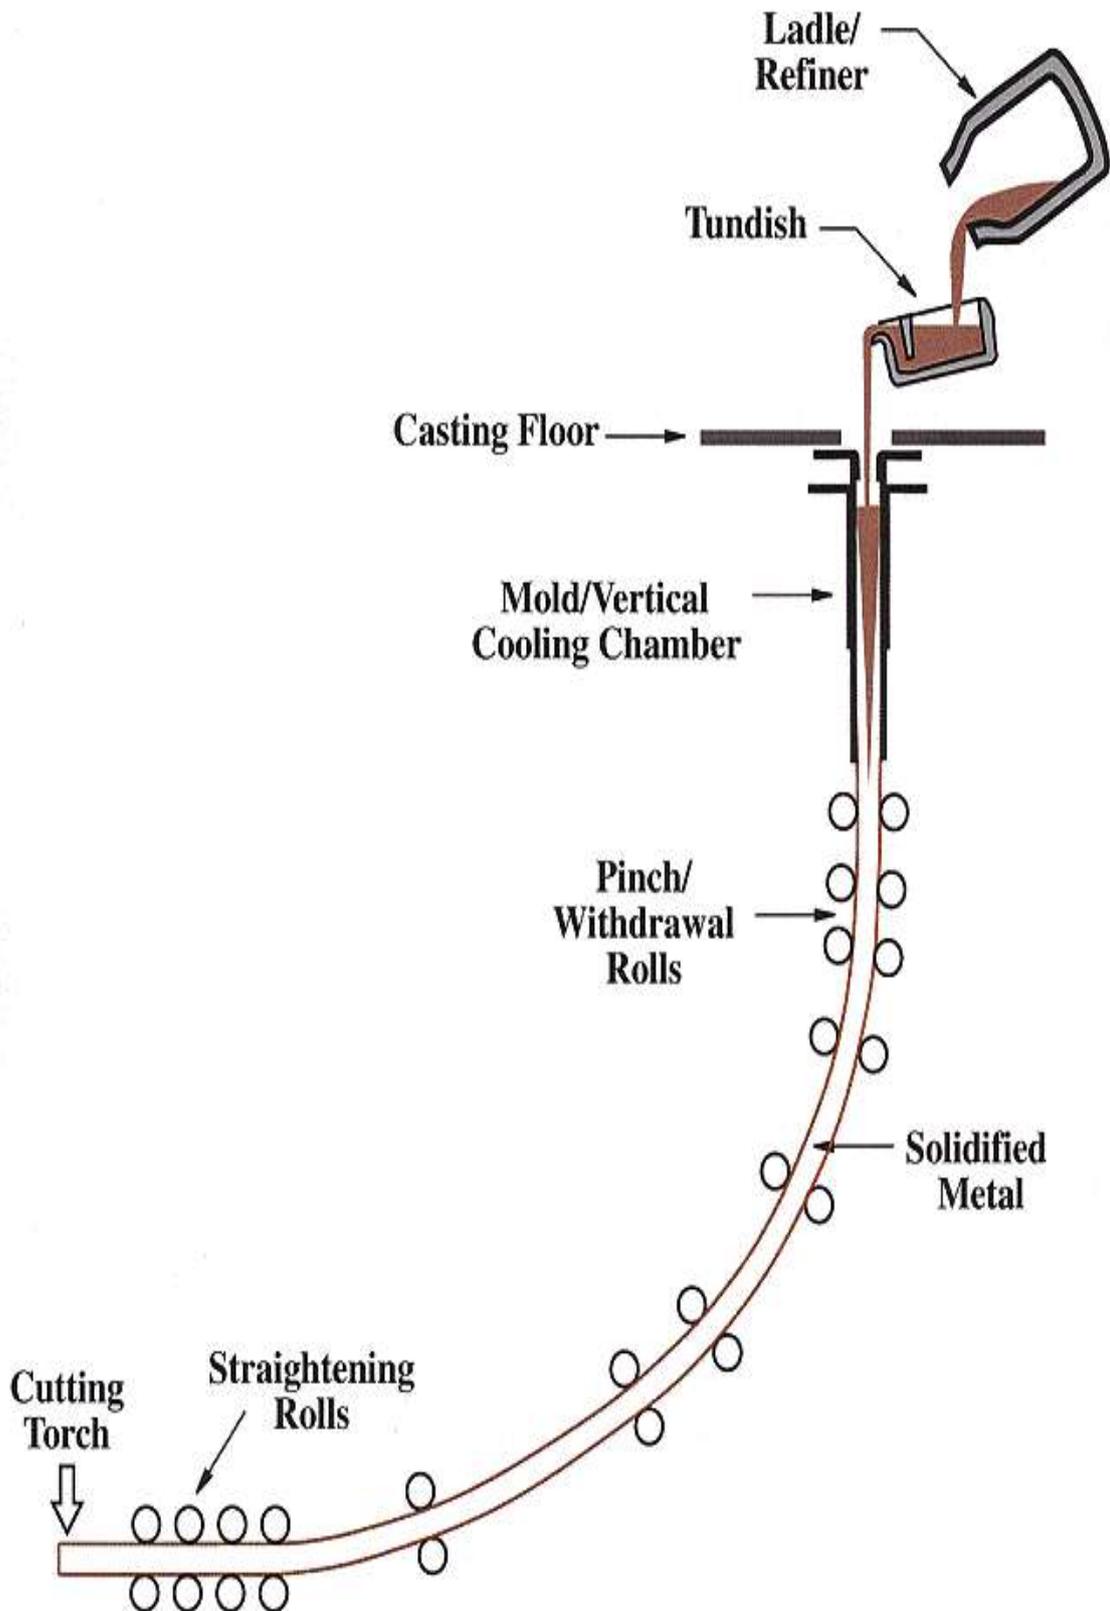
(b) Schematic Sketch of Continuous Casting Process with Straightening Rolls and Cutting Torch
